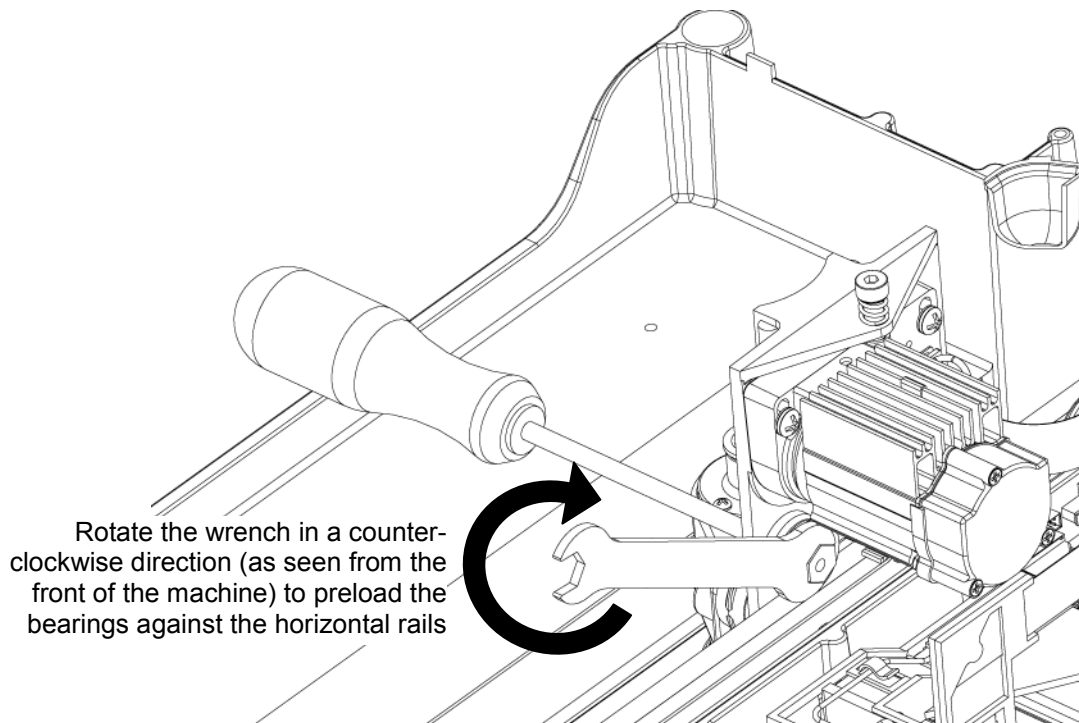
TIGHTENING THE ROLLER BEARINGS
